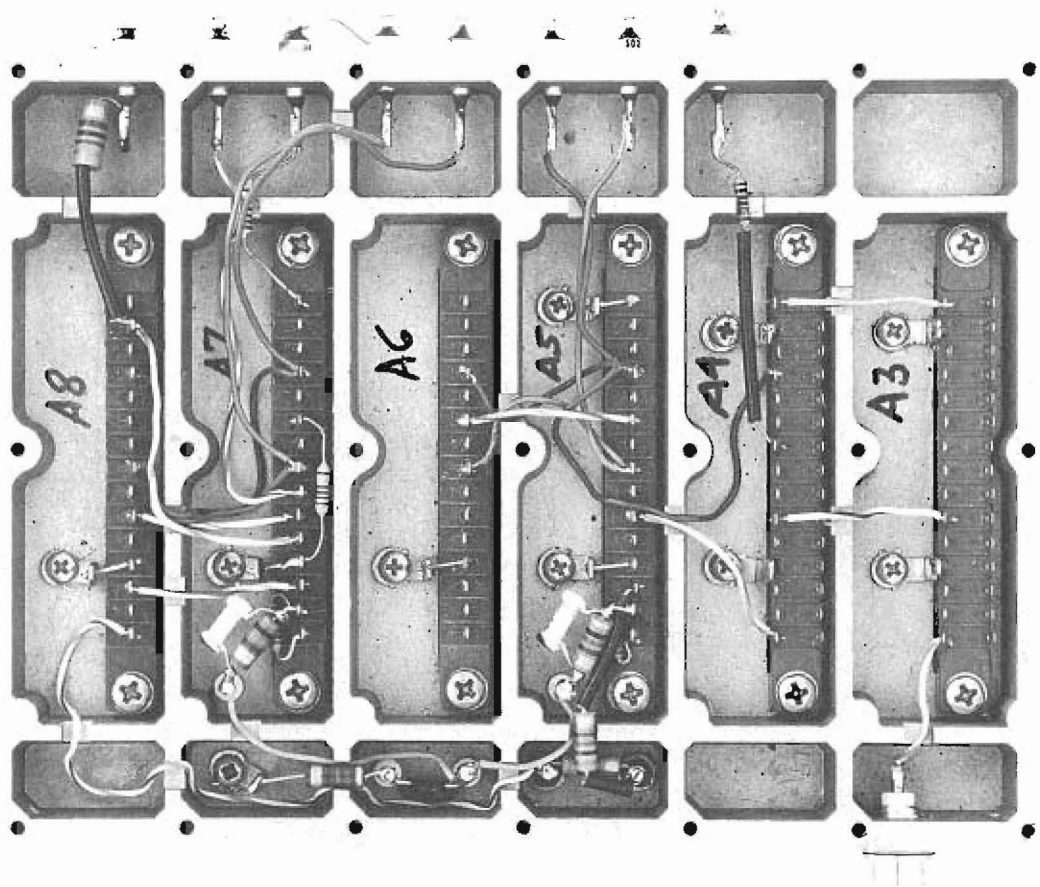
Subchassis Component and Parts Location, A2 Casting
